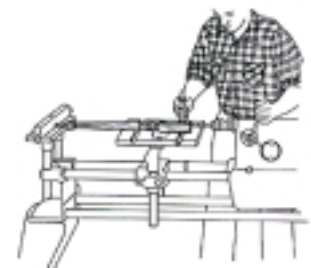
Forming dovetail socket in top of front leg. Horizontal bore removes about 80% of all waste stock.
